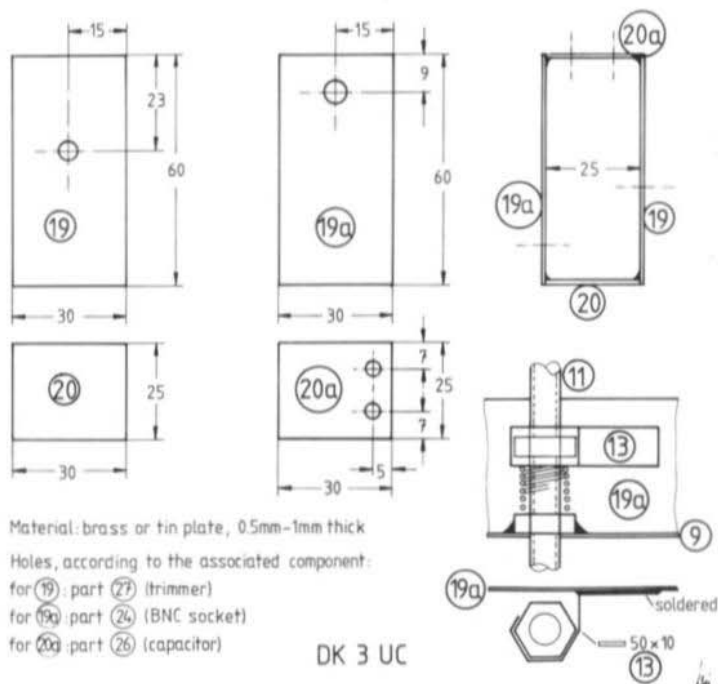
Parts of the cathode chamber and mounting bracket, part 13
